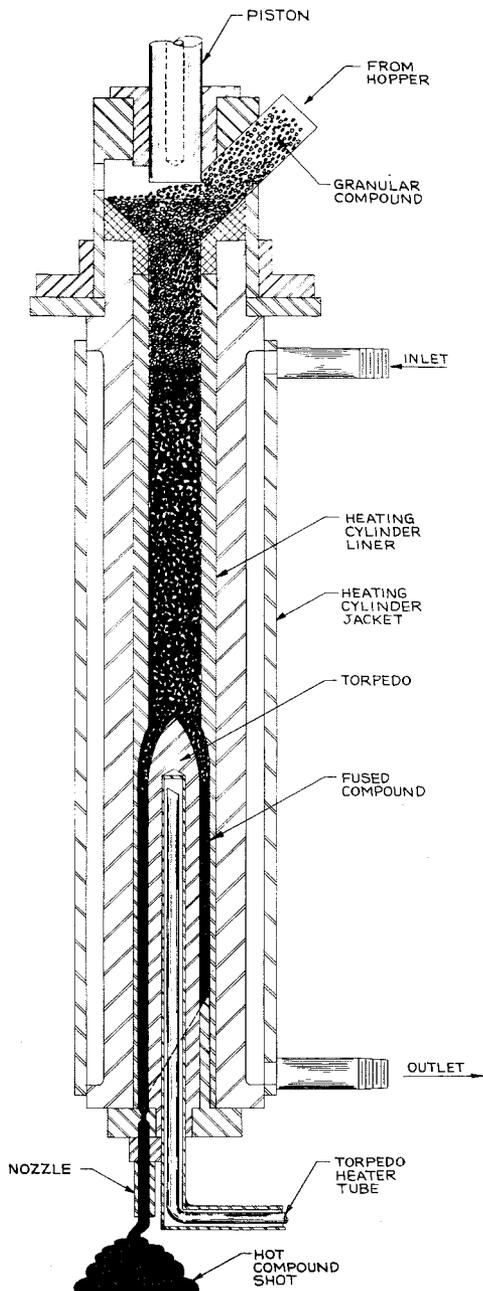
Pictorial drawing of cross section of compound extruder showing flow of material.
